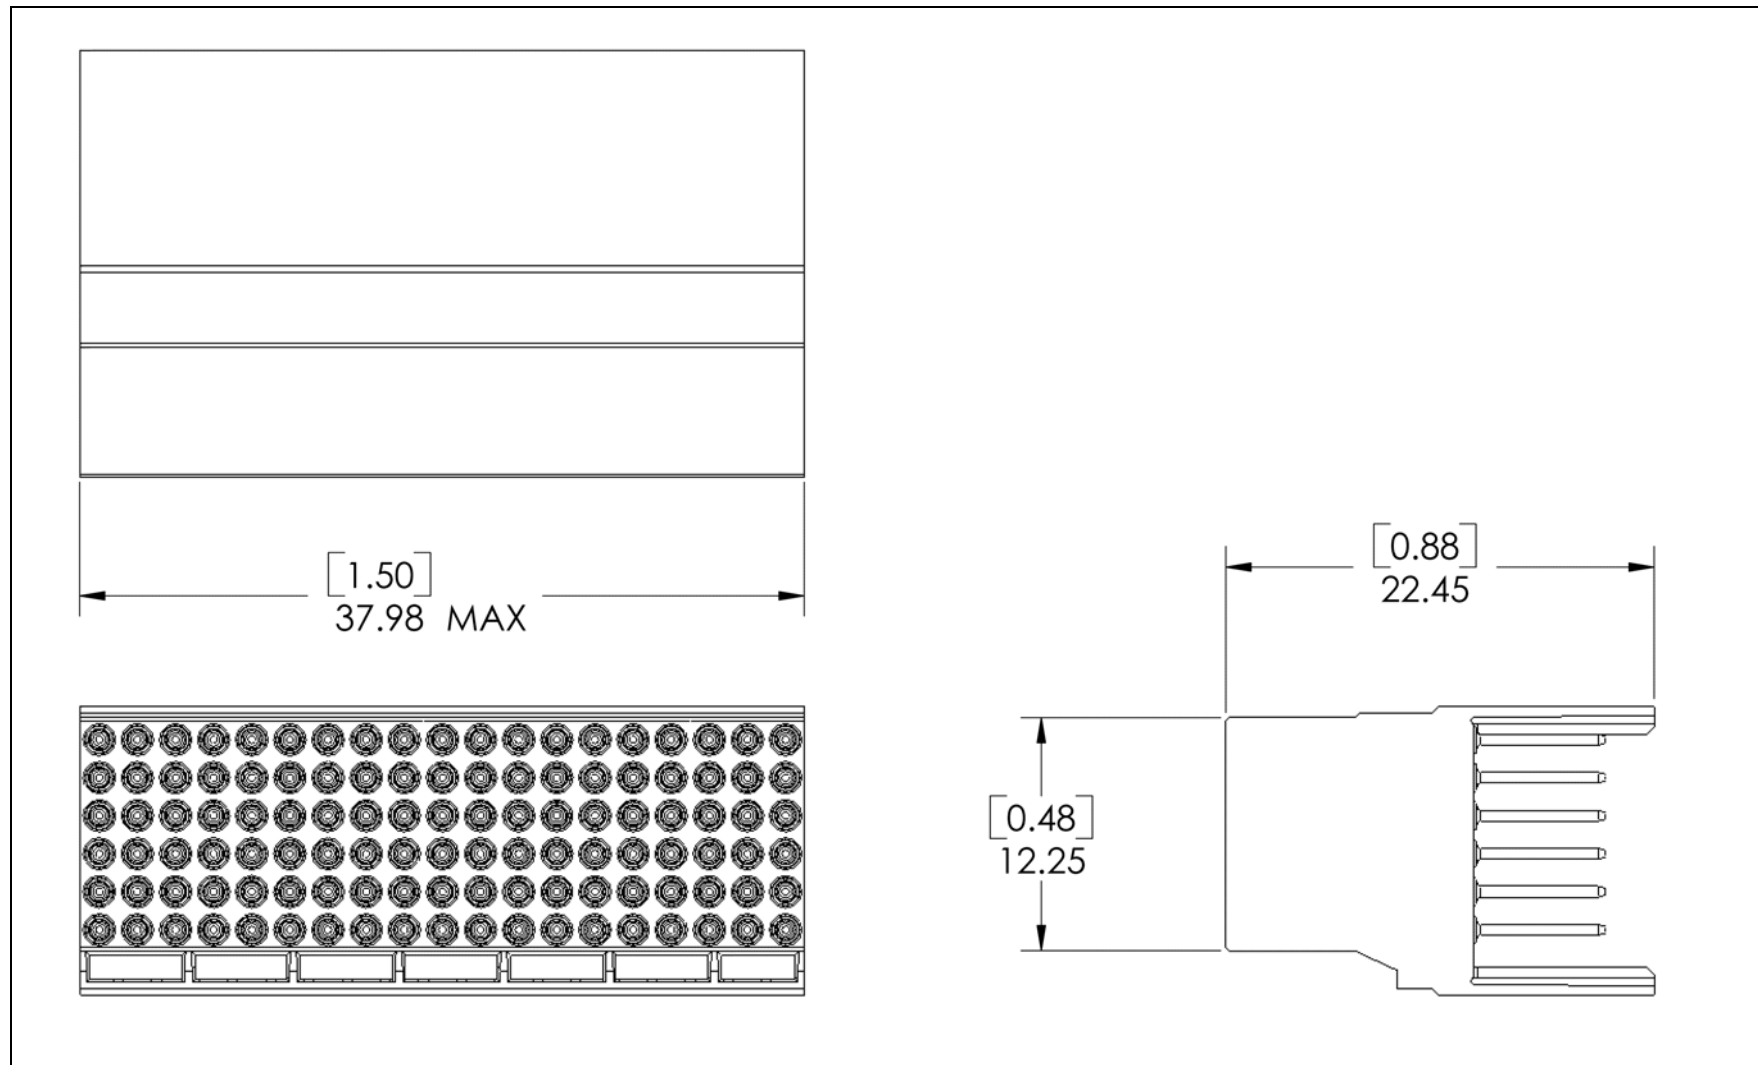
Adapter Connector, 31P822-MA-110-B
